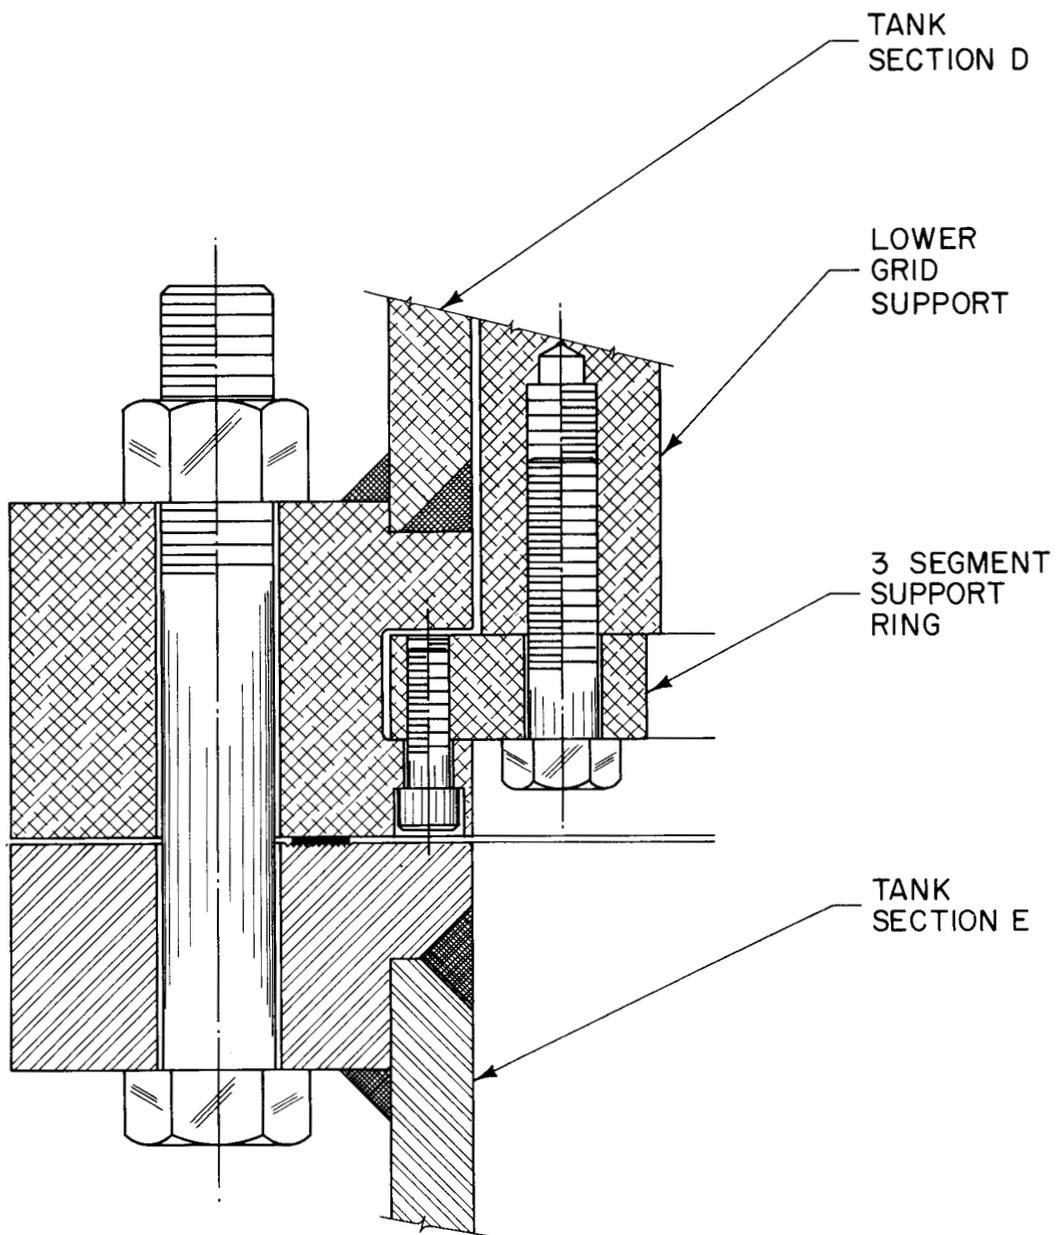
Flanged Connection Between "D" and "E" Tank Sections
